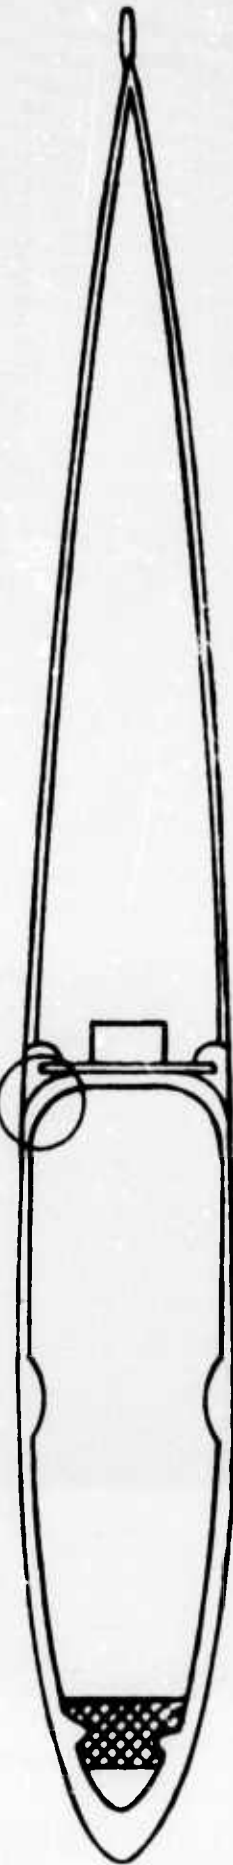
SPAR CROSS-SECTION DETAIL
